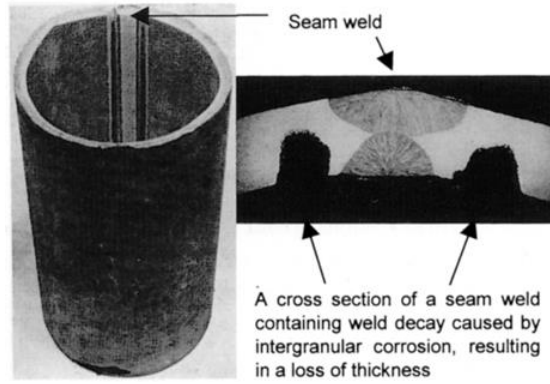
Weldment intergranular corrosion [5,6]
